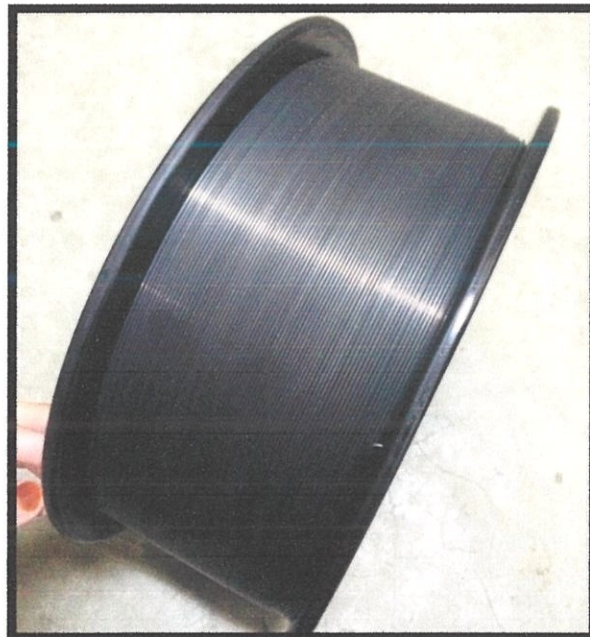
Flux Cored Arc Welding Wire.
